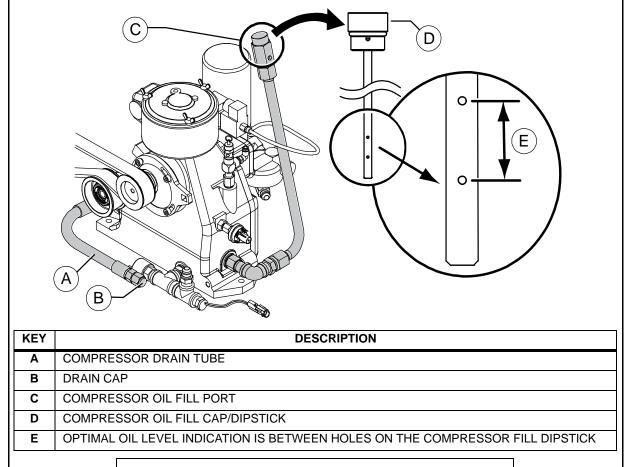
Compressor Oil Fill and Drain Tube Assembly
